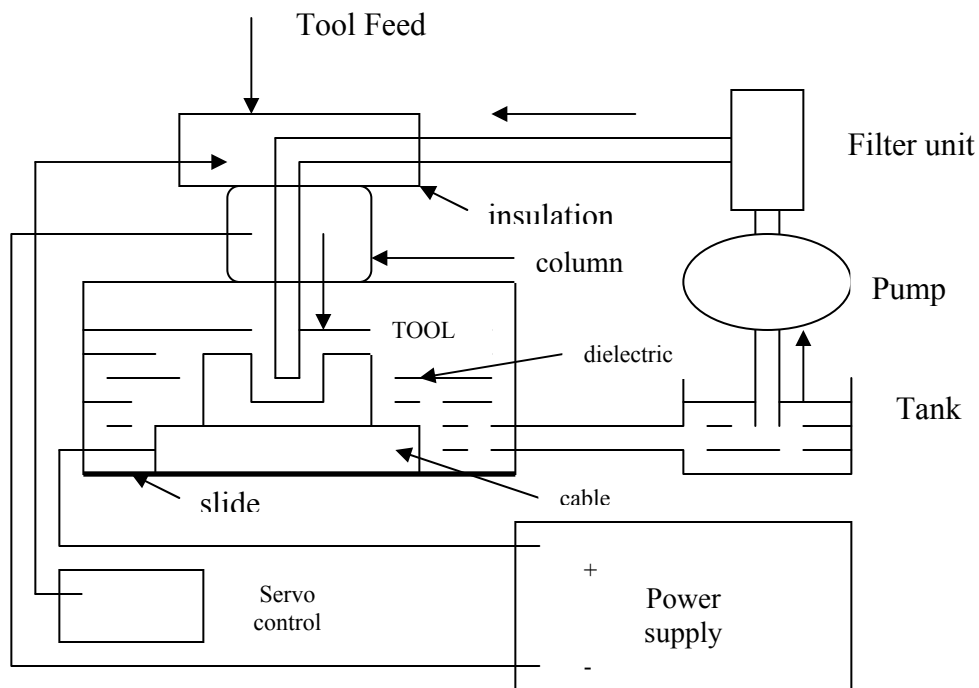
Schematic diagram of typical Electrical Discharge Machining (Chen and Mahdivian, 2000)
